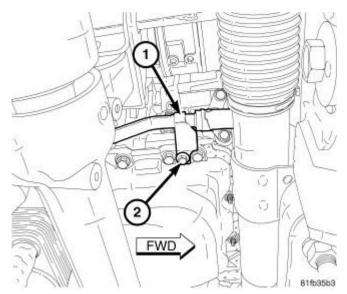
Oil Cooler Line & Bolt Courtesy of CHRYSLER LLC
